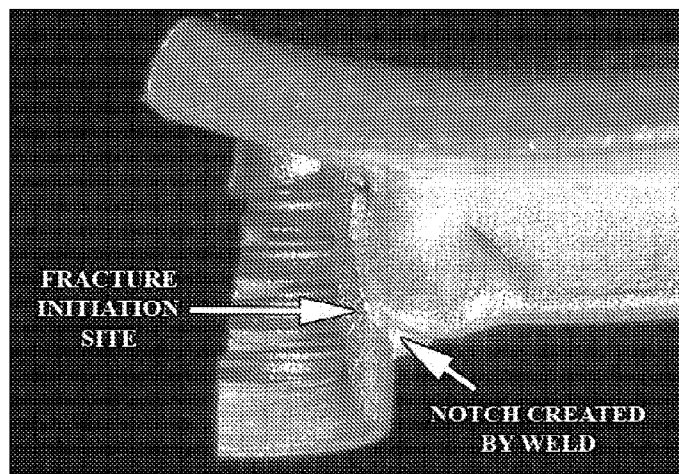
A side-view of the fractured trigger showing the location of the fracture initiation site relative to the notch created between the weld bead and the trigger adjustment screw boss.
